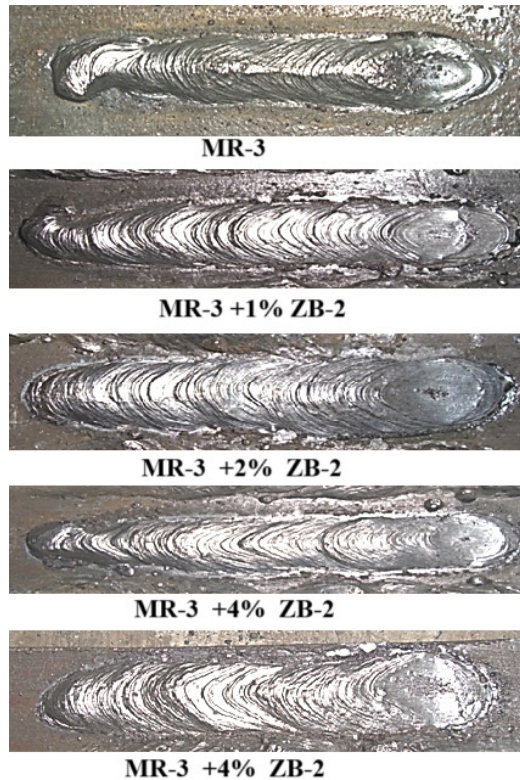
The appearance of weld beads made with experimental welding electrodes obtained from a mixture of MR-3 charge and ZB-2 photocatalyst additives.
